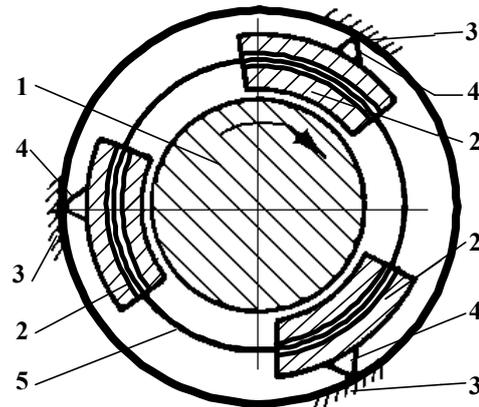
Adaptive hydrodynamic bearing with elastic ring which is easily moved and connects the segments: 1 - rotor, 2 - segments, 3 - spindle neck, 4 - adaptive thrust, 5 - elastic ring
